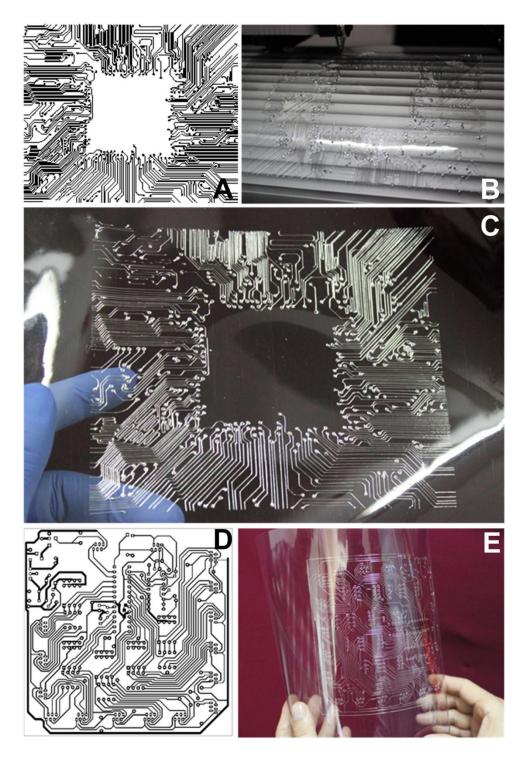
Printed PCB in a few minutes using the liquid metal printer. (A) Original PCB design draft; (B) PCB in printing on the machine; (C) Manufactured results of (A); (D) Additional PCB draft; (E) Printed PCB of (D). (Jing Liu)
